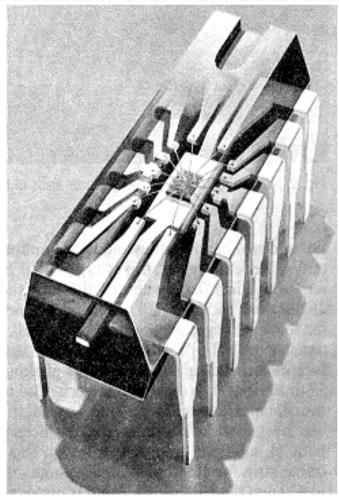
View of lead frame positioning in postmolded nonhermetic package showing wire interconnects from chip to inner leads of lead frame
